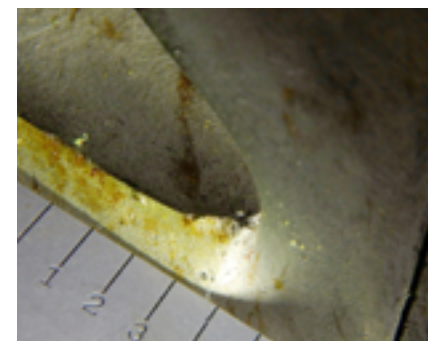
Fractured forward compressor blade with leading edge pitting at the origin
